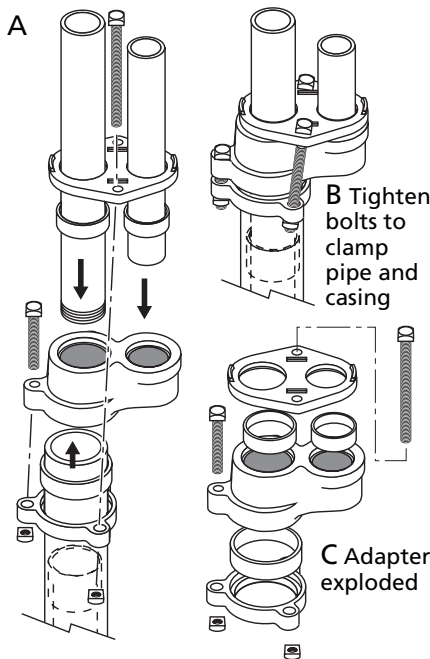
Pkg 4HFC2 Casing Adapter Assembly
